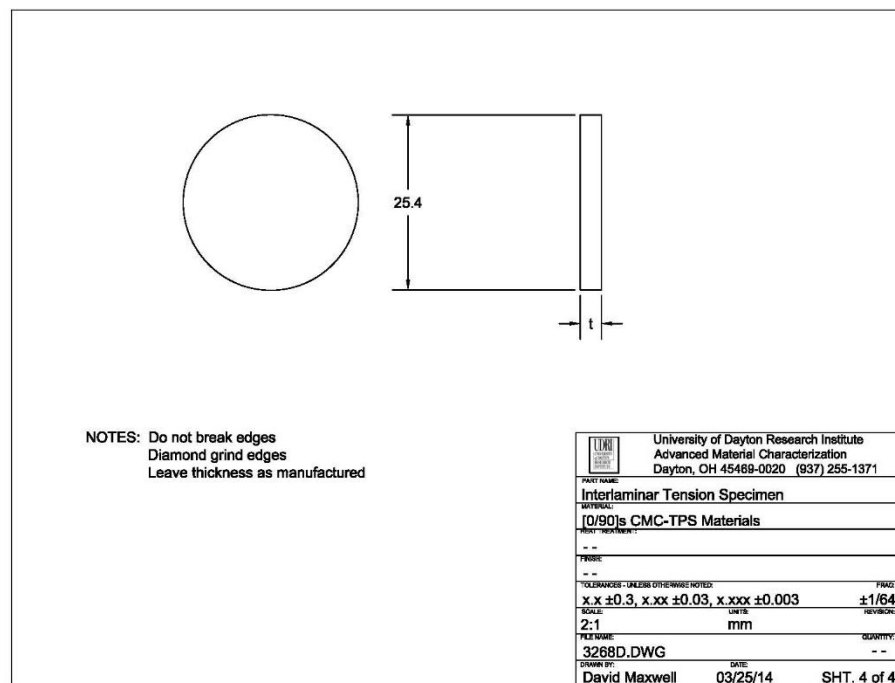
Machining Drawing For Interlaminar Tension Specimen
